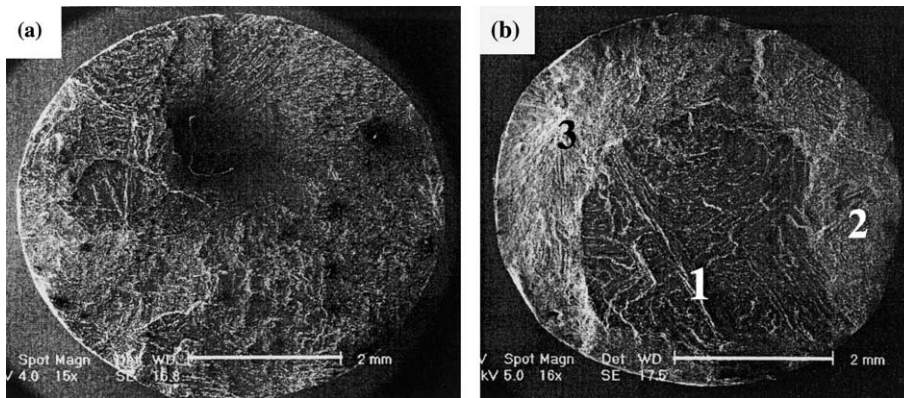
Fracture surfaces of tensile specimens tested at 20 °C (a) and 320 °C (b). The latter surface is divided in three areas corresponding to the ferrite major fracture mechanisms: area 1 – cleavage, area 2 – shearing, area 3 – ductile fracture.
